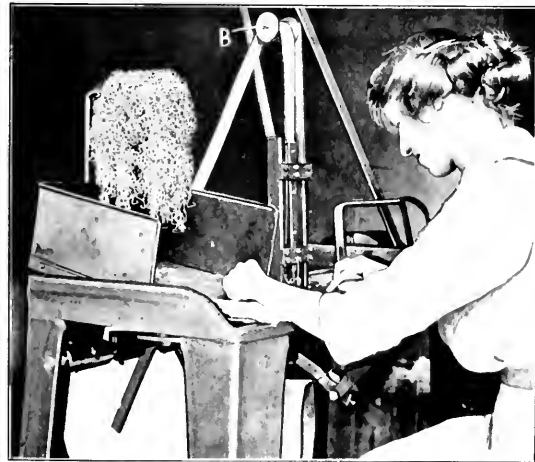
Machine used for carding the Steel Wire Lacing Hooks
